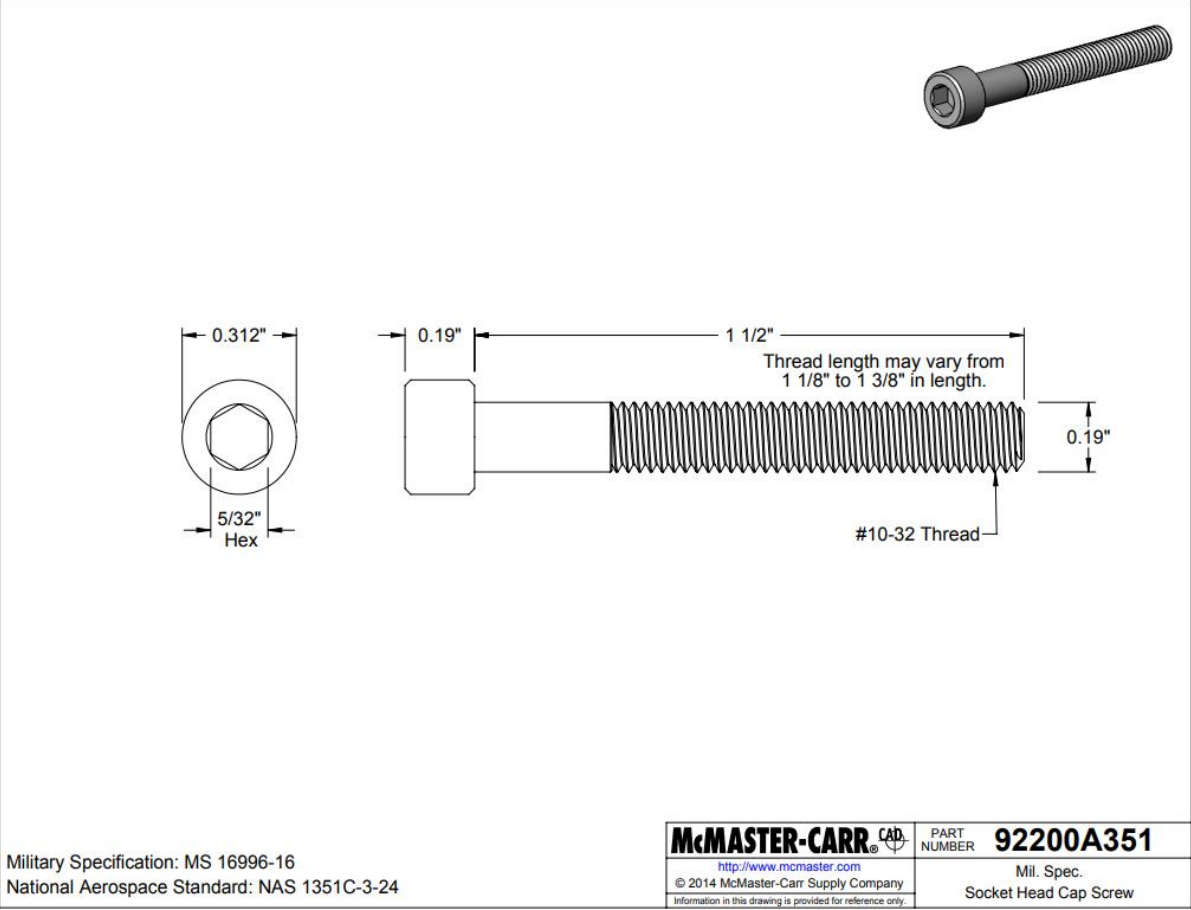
Six of these screws will be used to lock the hub and clutch bearing into place up against the sprocket.
